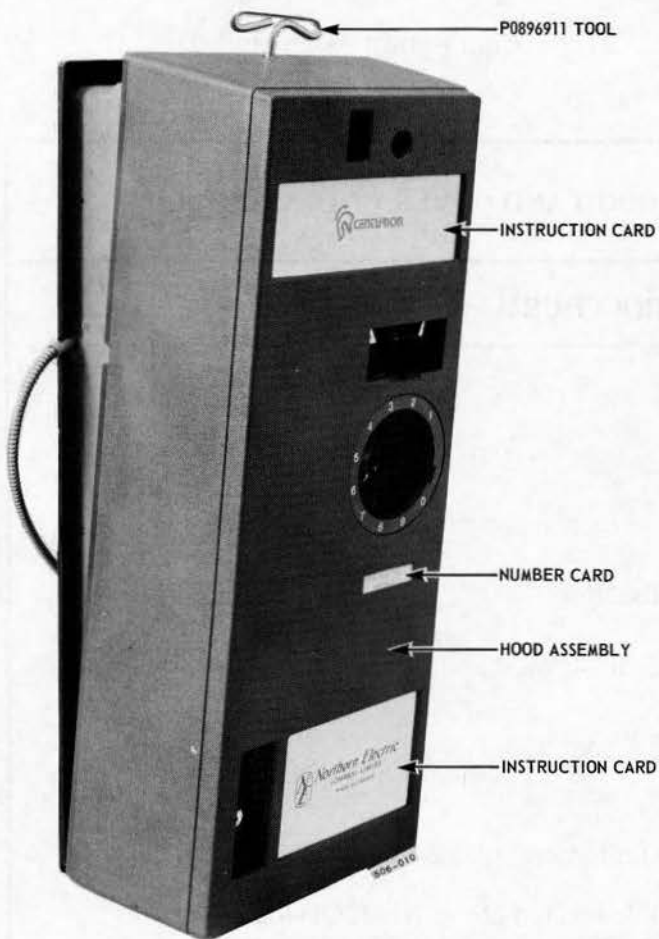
Coin Telephone Set Showing the Location of P0896911 Tool When Unlocking the Hood Assembly
